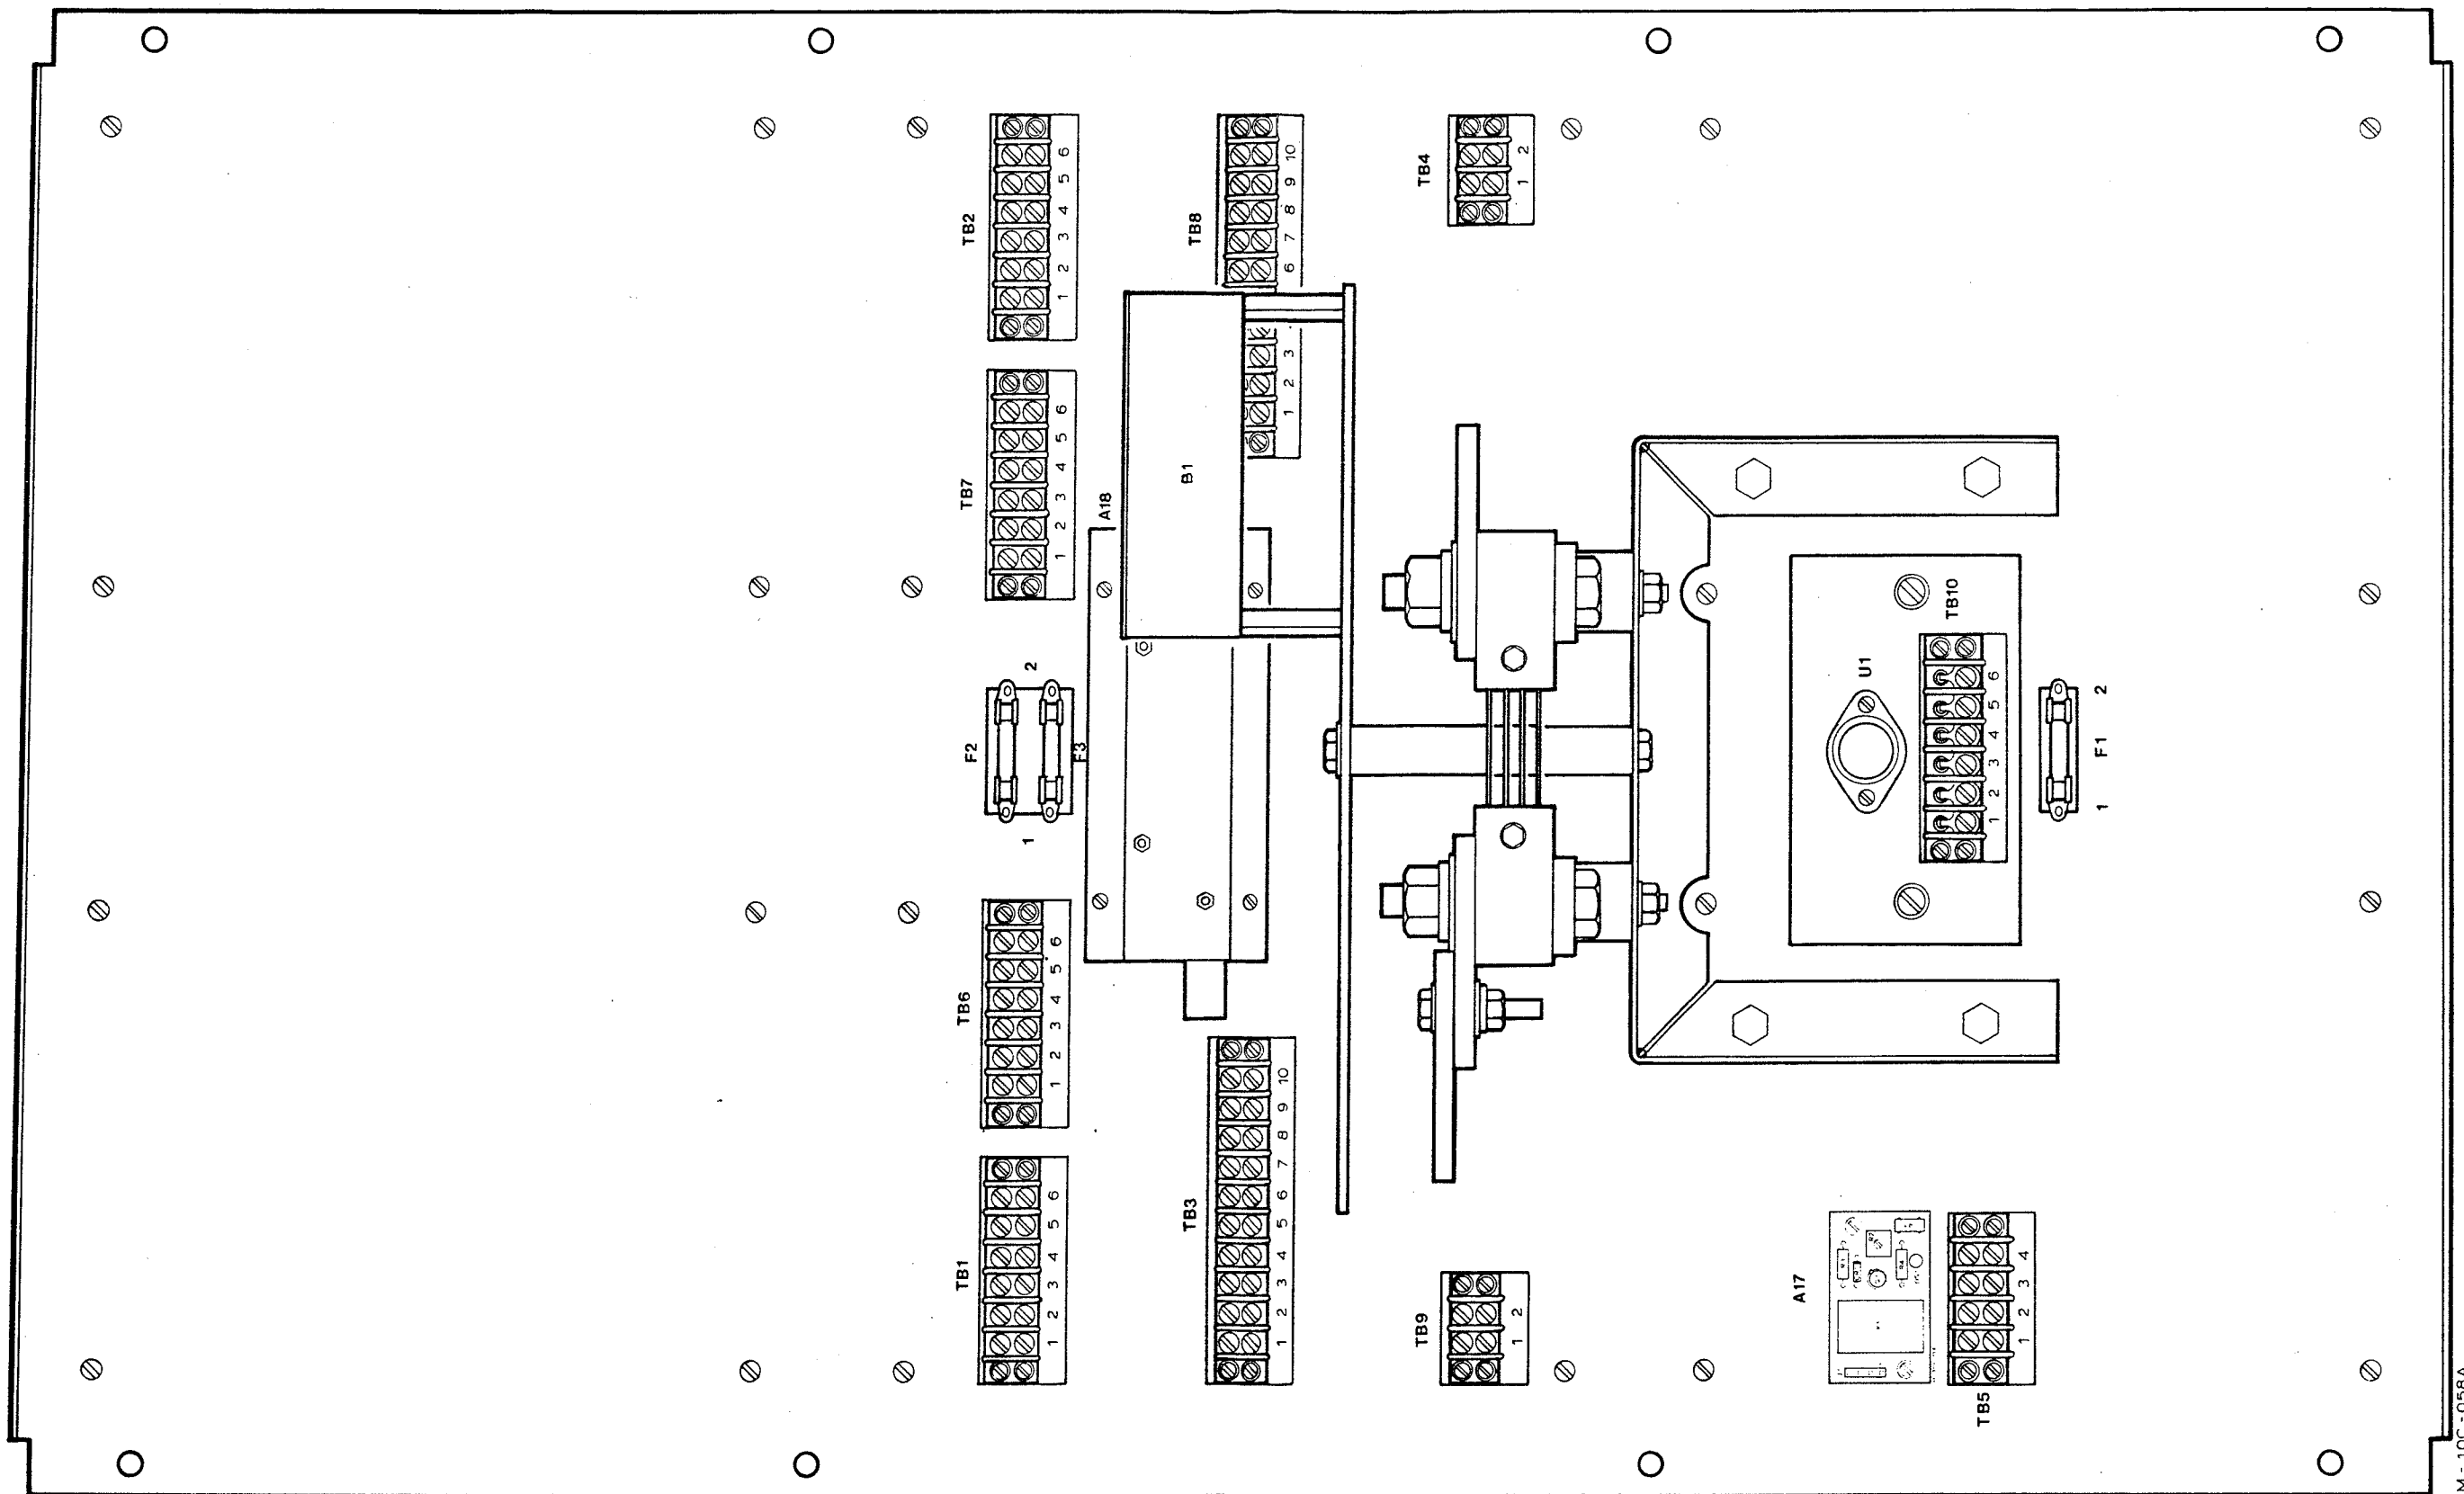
Assembly Detail - Current Shunt/Interface Panel Assembly (P/N149-4045/1)
